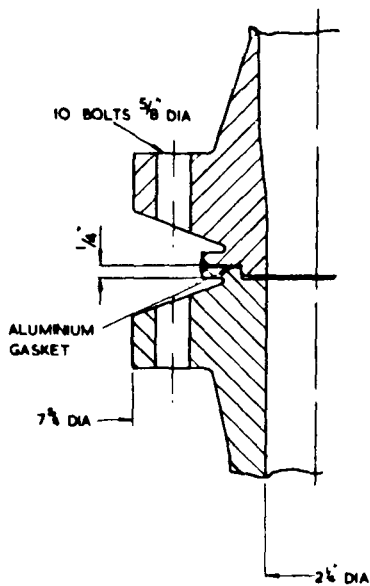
Typical seal welded joint as used on control rod branches
